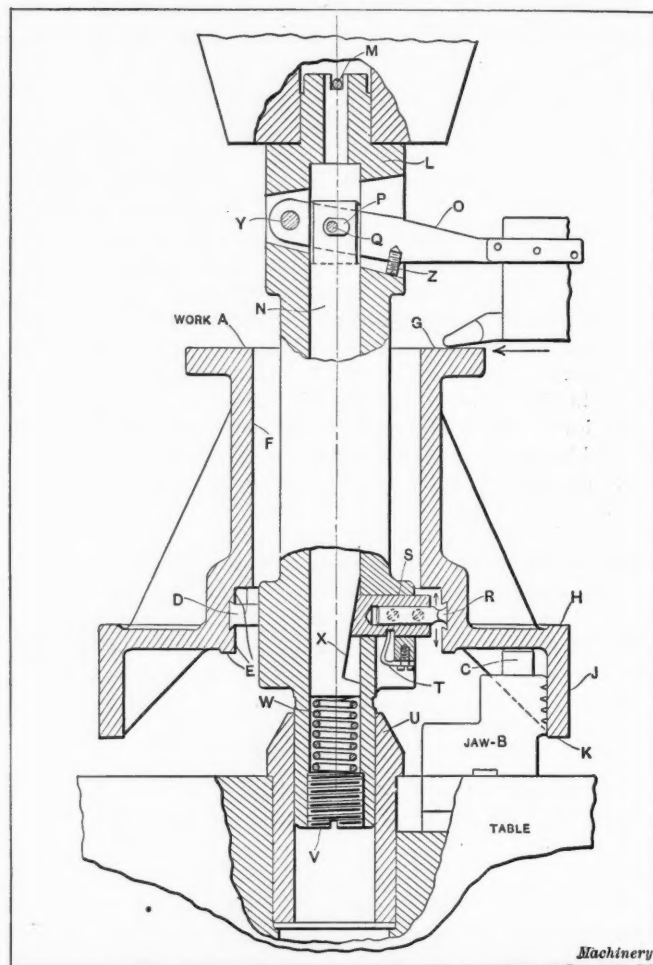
A Recessing Tool cutting a Dovetail-Shaped Recess
